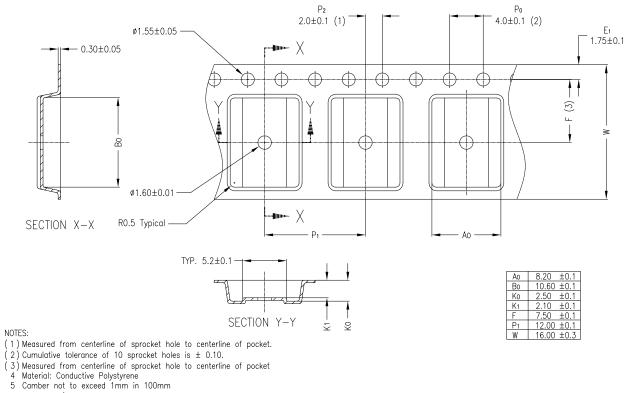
28-pin SSOP (209 Mils) C-PAK Carrier Tape Drawing, 51-51100
